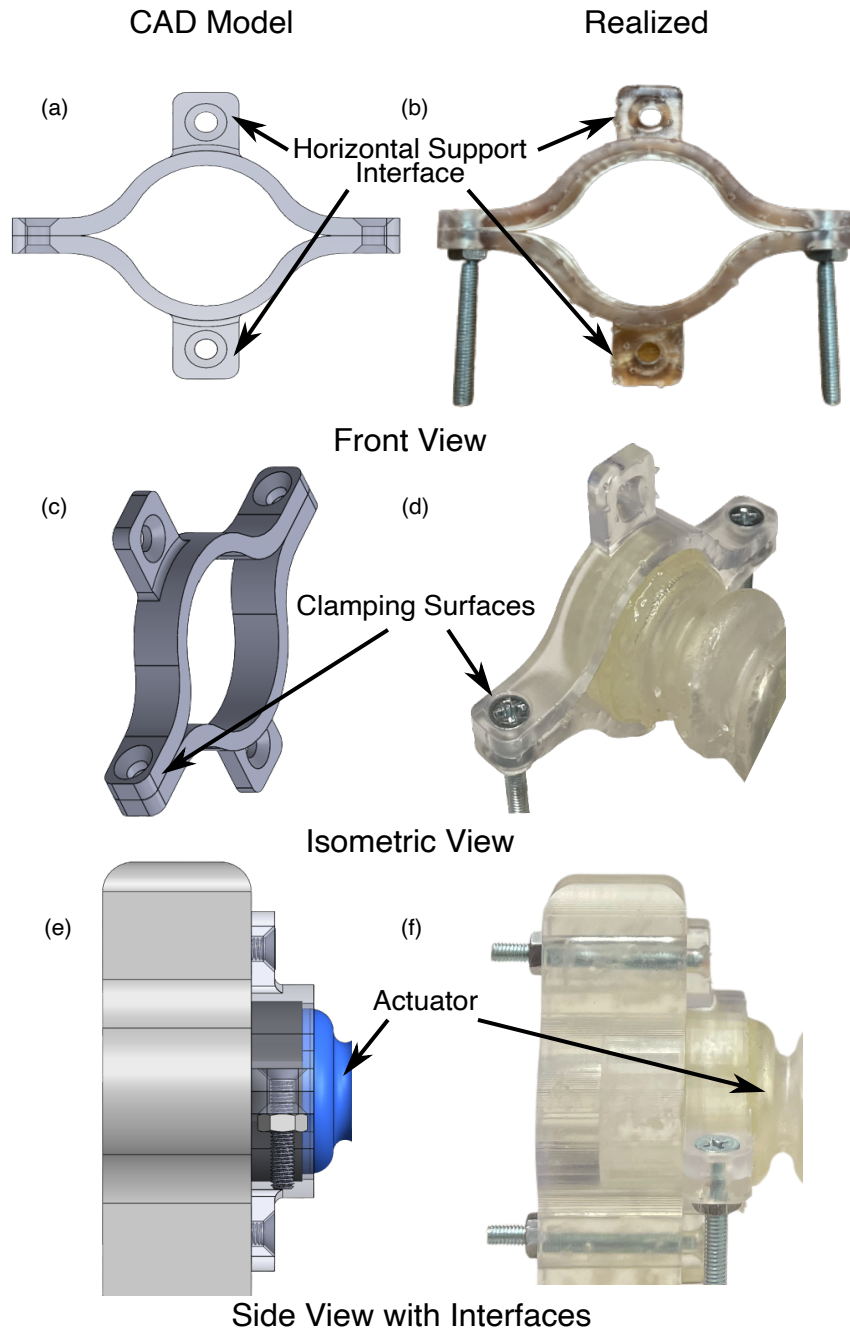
C-clamp attachment's CAD model manufactured component, and interfaces. The front views of the C-clamp are shown in (a) and (b), and isometric view in (c) and (d). In (e) and (f), the CAD modeled interfacing strategy and the realized interfaces between the C-clamp, actuator and horizontal support are shown.
